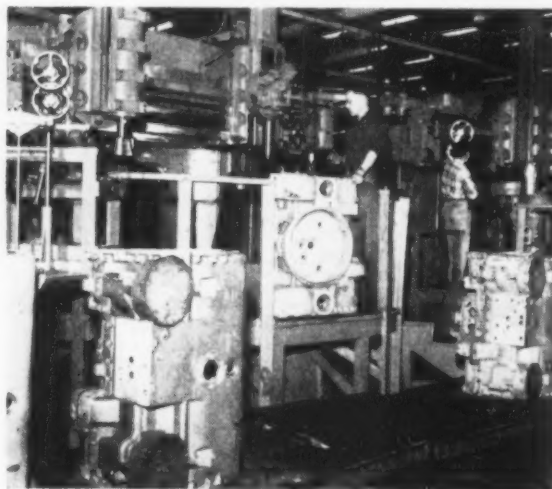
Transmission housing assemblies are bored on two 64-in. vertical spindle Bullard turret lathes. Deep 30-in. cuts require stiff boring bars to avoid chatter.
